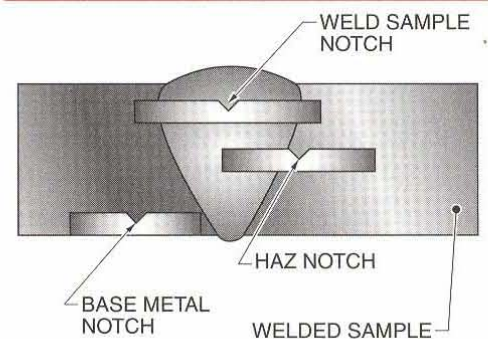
Charpy V-notch test specimens machined from different locations in a weld may exhibit different notch toughness values.
